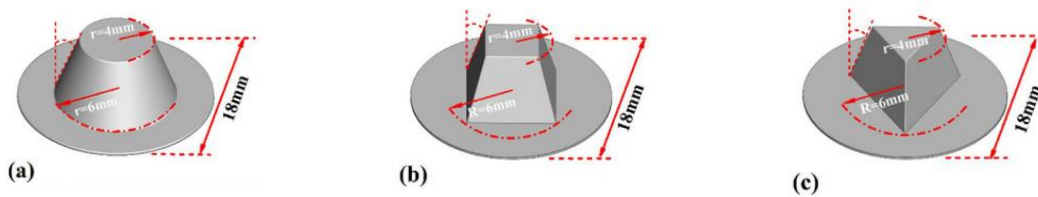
Pin geometries used to weld PMMA plates with conventional FSW: (a) cone frustum, (b) square frustum and (c) triangle frustum [73].
